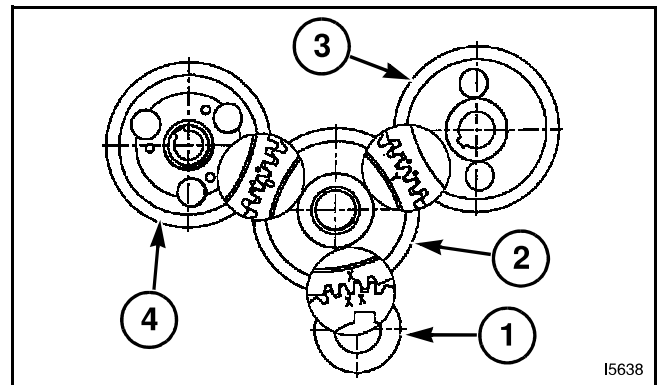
It is designed that the valve timing becomes proper when the markings XX are aligned to X, 00 (counter sinks) to Y, and 00 (counter sinks) to 0 between timing gears as illustrated. Before tuning the valve timing the piston in the #1 cylinder should be set at TDC, which will makes the operation easier.
